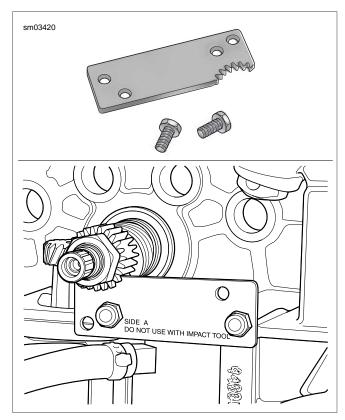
Crankshaft Locking Tool (Part No. HD-43984)
